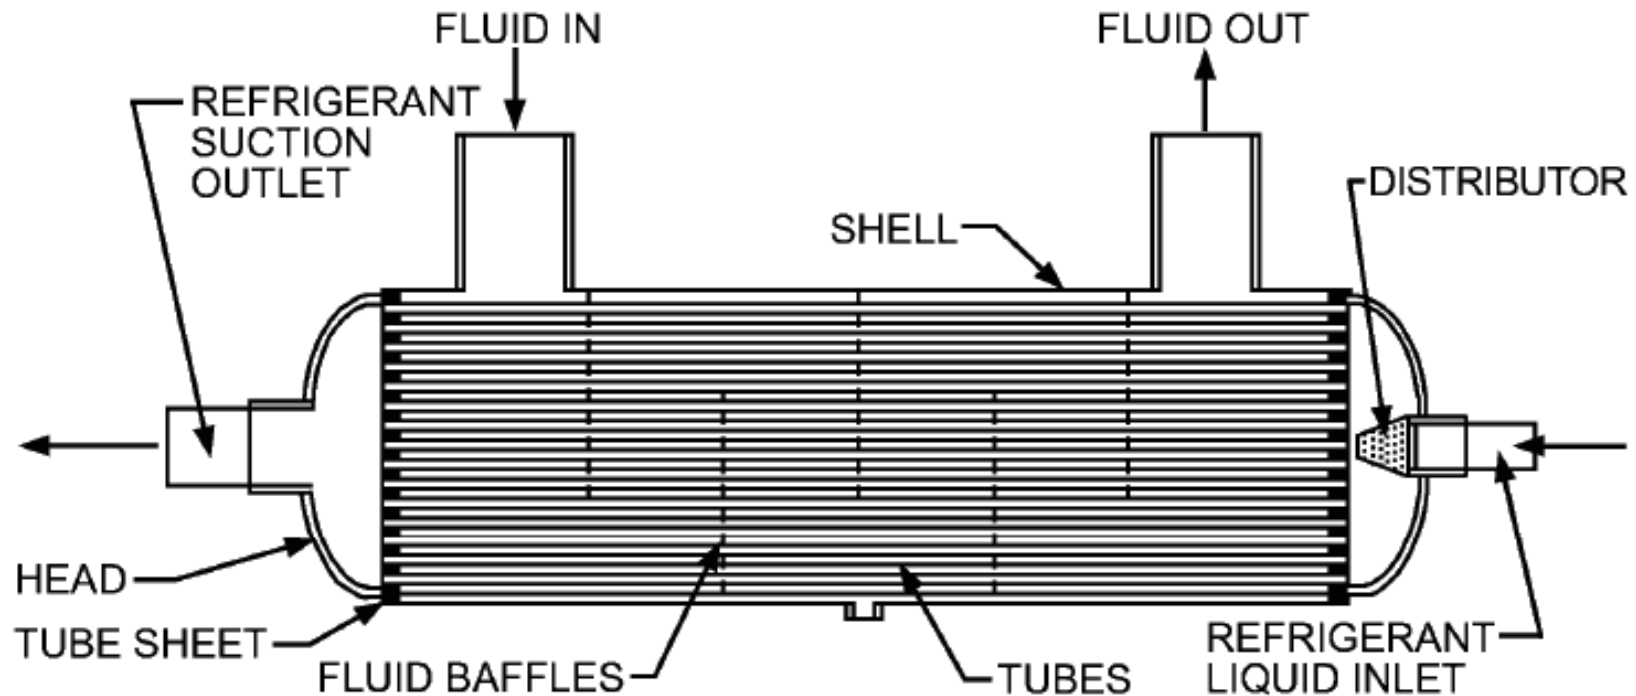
Direct-Expansion Shell-and-Tube Cooler
